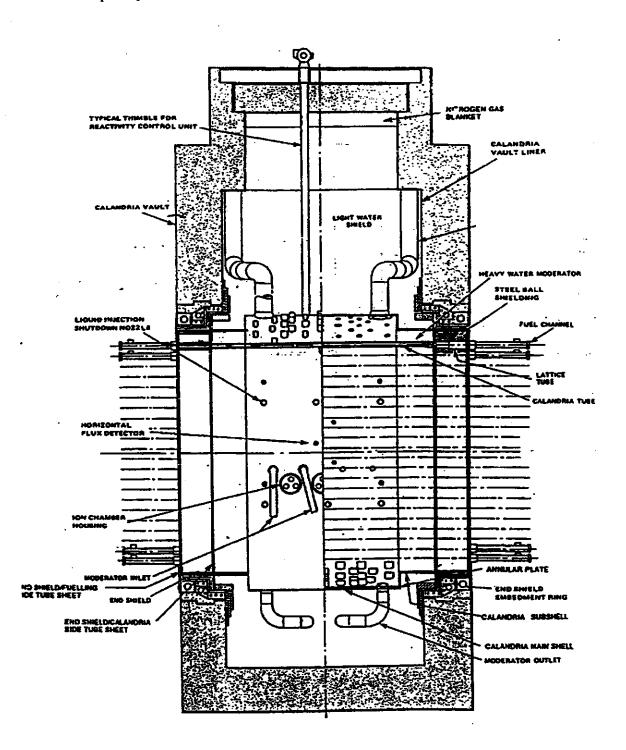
CANDU 6 Reactor and Vault Arrangement - Side Elevation
